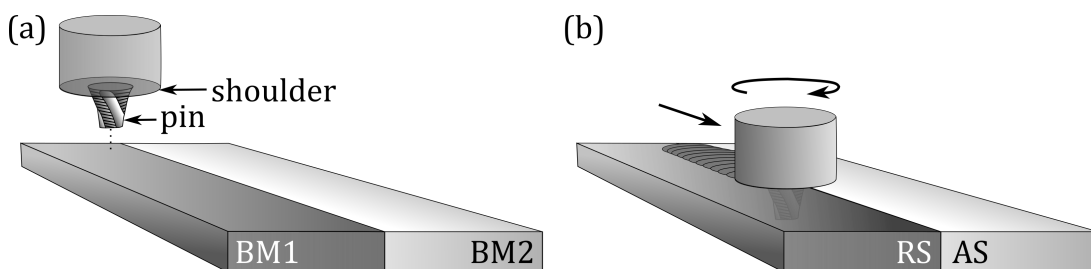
Illustrations of a typical setup used for FSW of Al and steel. (a) Schematic setup before FSW, which shows the tool with its threaded pin and shoulder and the two BM plates. (b) Setup during FSW, which shows the tool traversing the weld seam while it rotates and plastically deforms the materials. Inspired by [81].
